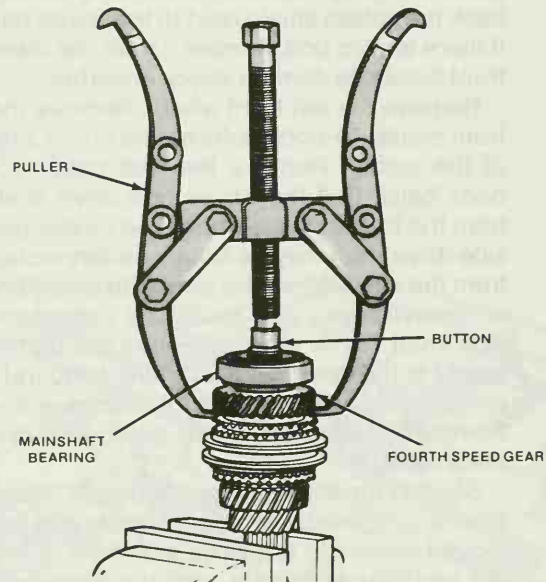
A puller is used to remove the mainshaft bearing and mainshaft fourth-speed gear. (Chrysler Corporation)
